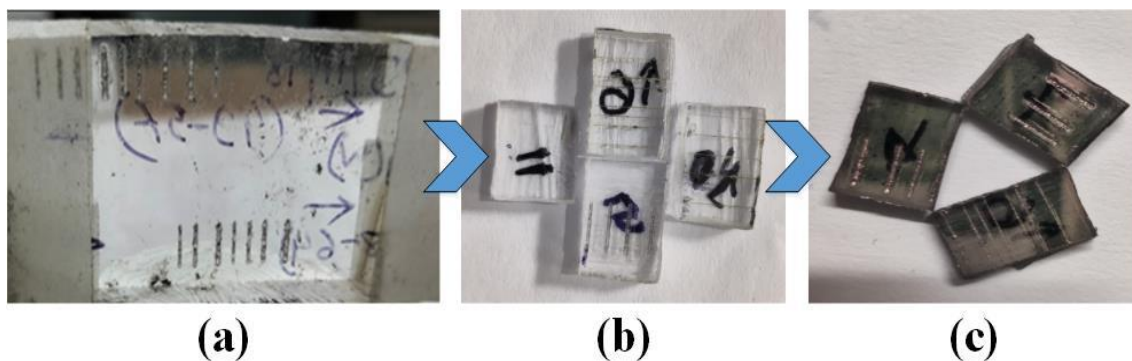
PMMA workpiece after fiber laser transmission cutting in air medium, (a) Parent sample, (b) Sliced micro-machined sample, (c) Gold coated micro-machined sample.
